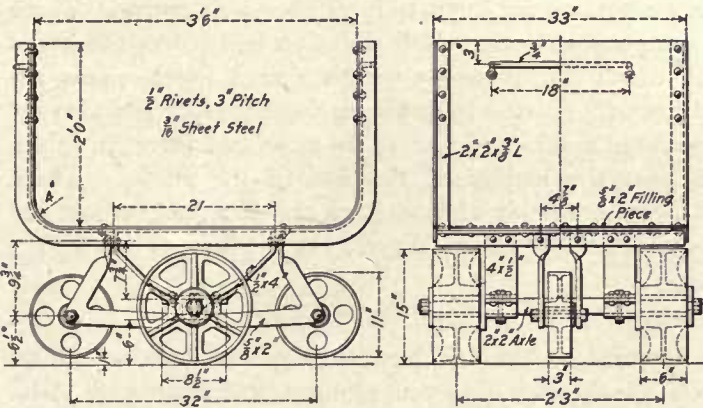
Steel Cart for Iron Cut to Length for Bolts.
